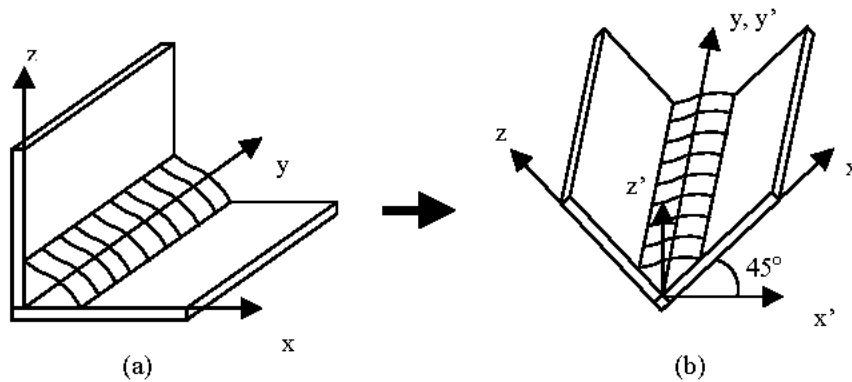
Horizontal fillet weld and coordinate systems
